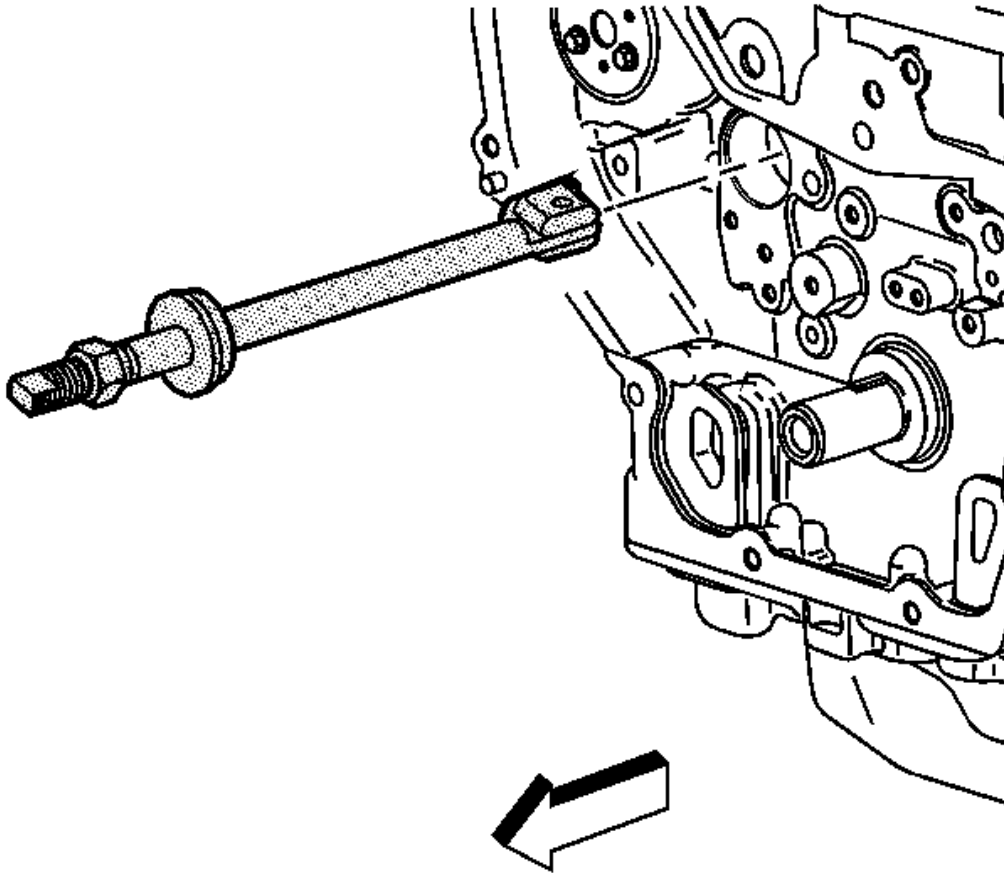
View Of Balancer Shaft Bearing Remover & Installer
